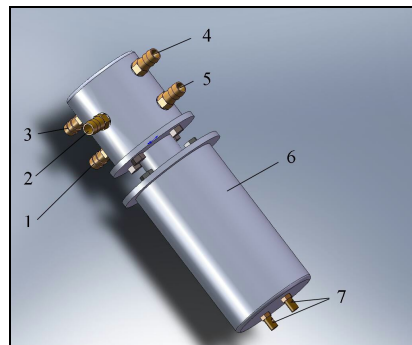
Fuel switcher (1-biodiesel in; 2- to injection pump; 3-diesel fuel in; 4-diesel fuel out; 5- injection pump retour; 6-electromagnetic command system; 7-electric connexions).
